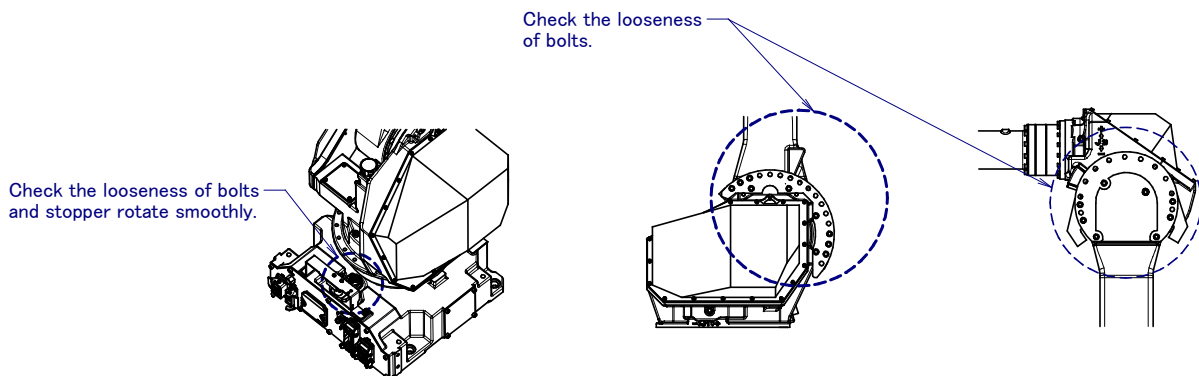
(a) Check of mechanical stopper and adjustable mechanical stopper.
